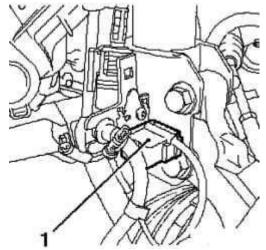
Sensor spring rack CDC: 1 - Sensor
